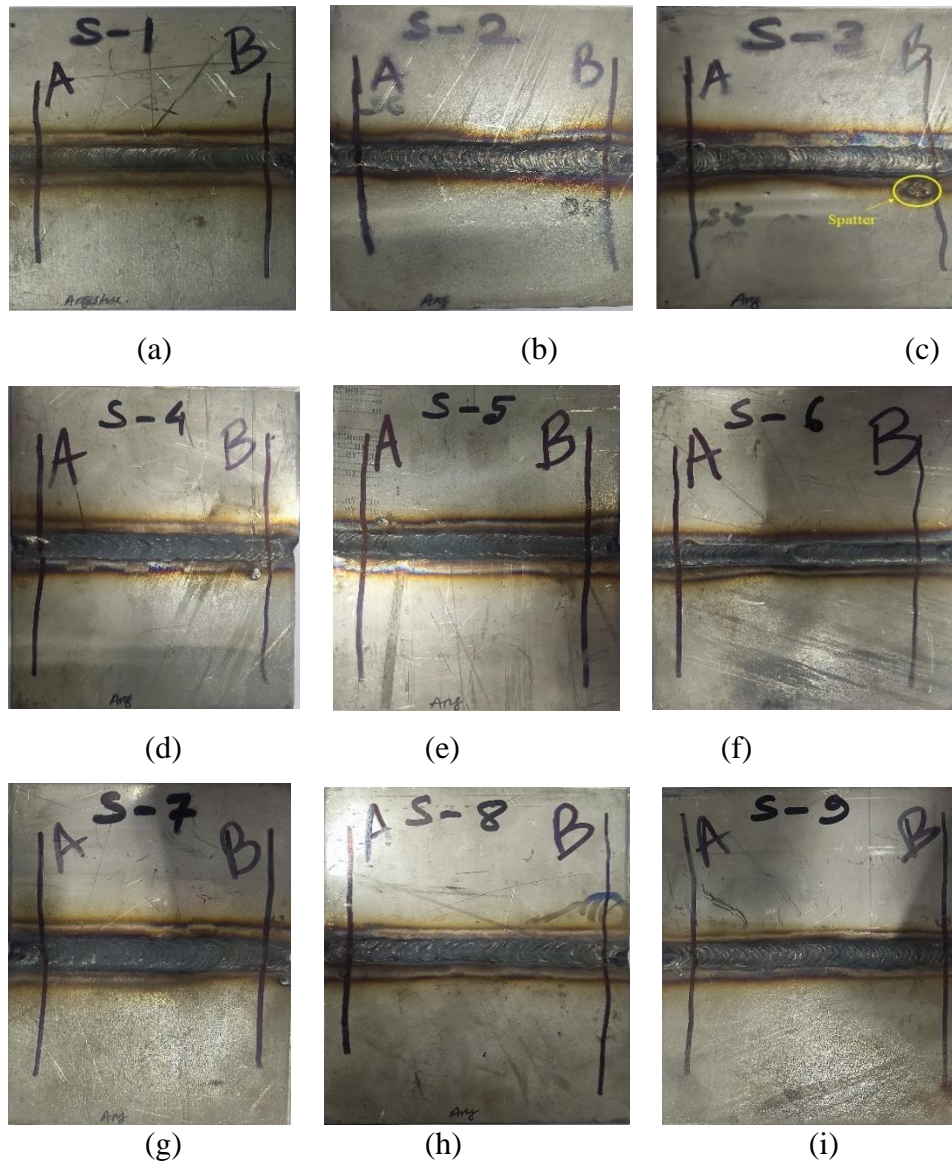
Austenitic SS 304L (a - i) total numbers of welding plates
